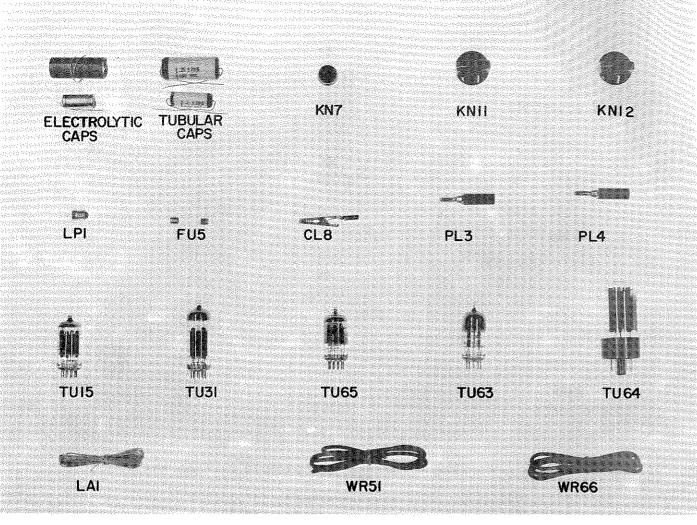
E. The parts used in the final assembly are shown above and listed below.
